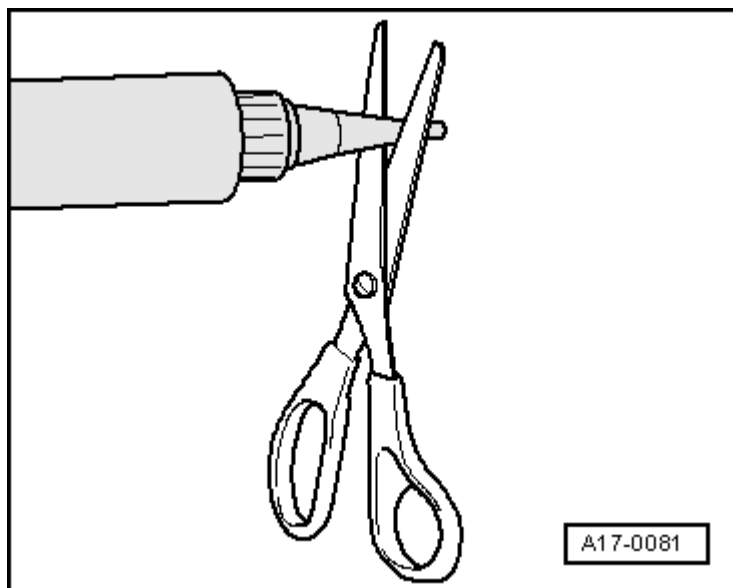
Cut Tube Nozzle At Front Marking (Nozzle Diameter Approx. 3 Mm)
